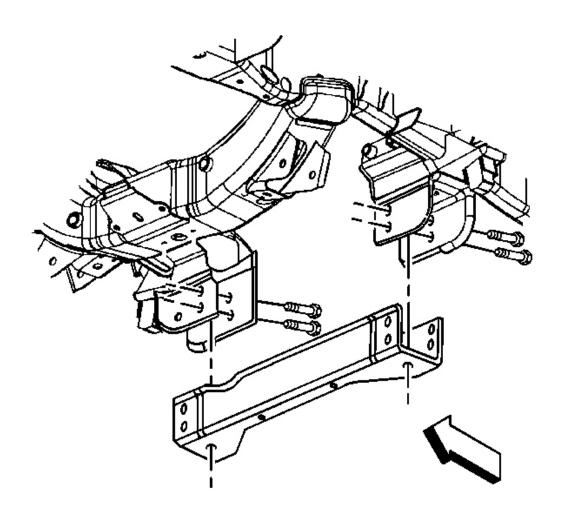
View Of Crossbar Bolts & Bar (2WD) Courtesy of GENERAL MOTORS CORP.
